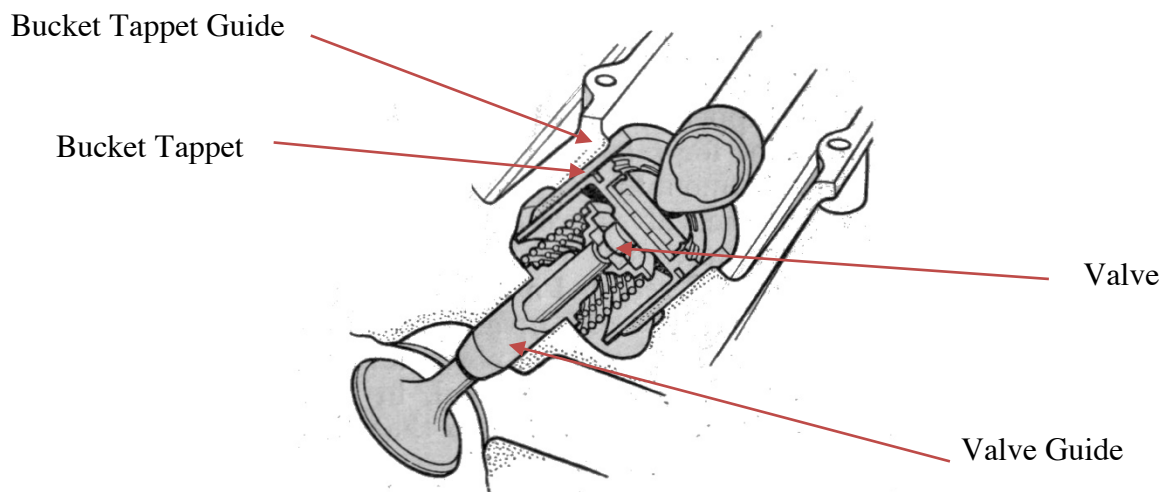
Schematic representation of a bucket tappet mechanism mounted on the engine [14].
